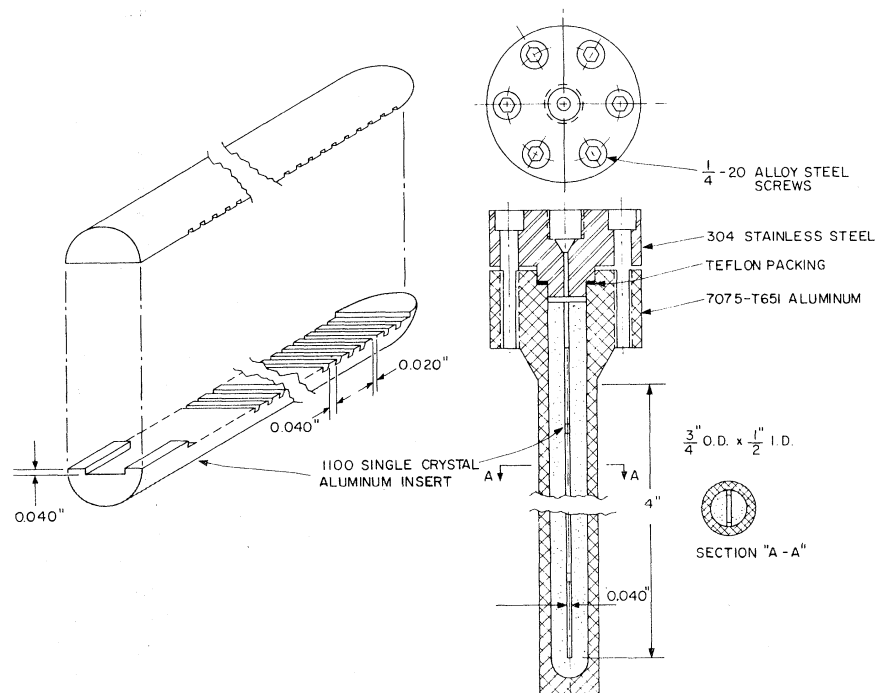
Sketch of the sample container and the single-crystal aluminum insert.
